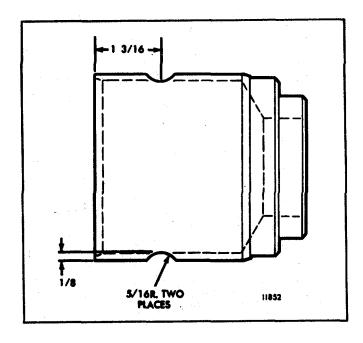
Instructions for Reworking Adaptor J 1686-13
